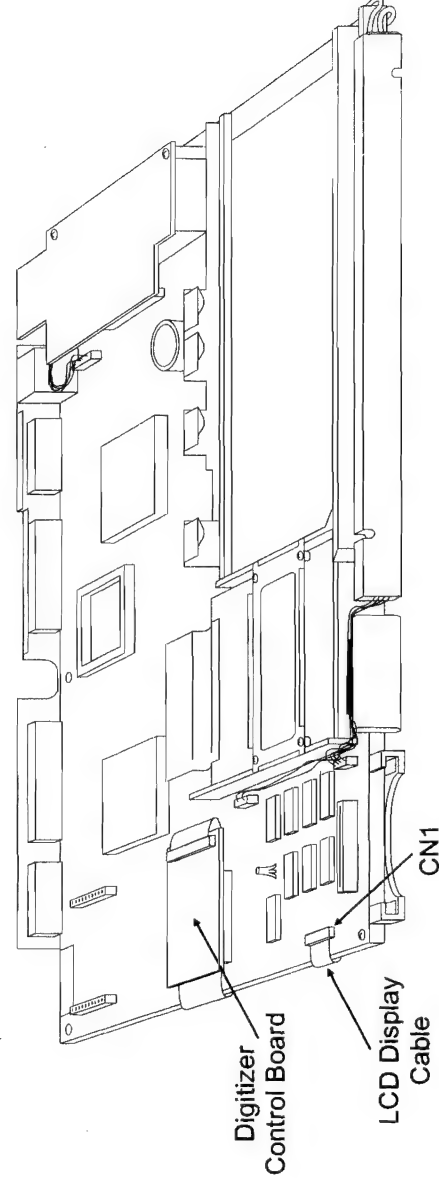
Connecting or Disconnecting the LCD Cable and the Digitizer Control Board
